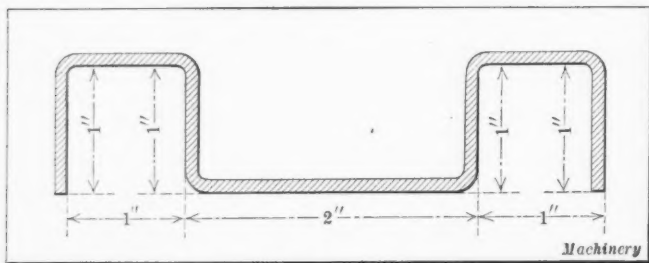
Cross-section of Sheet Metal Bend considered in Second Example
